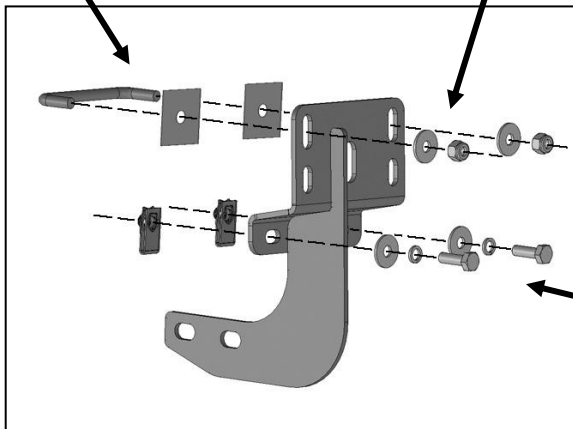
Model without existing holes, drill 3/8" holes at marked locations for U-Bolts, 5/16" through pinch weld for Clip Nuts.
